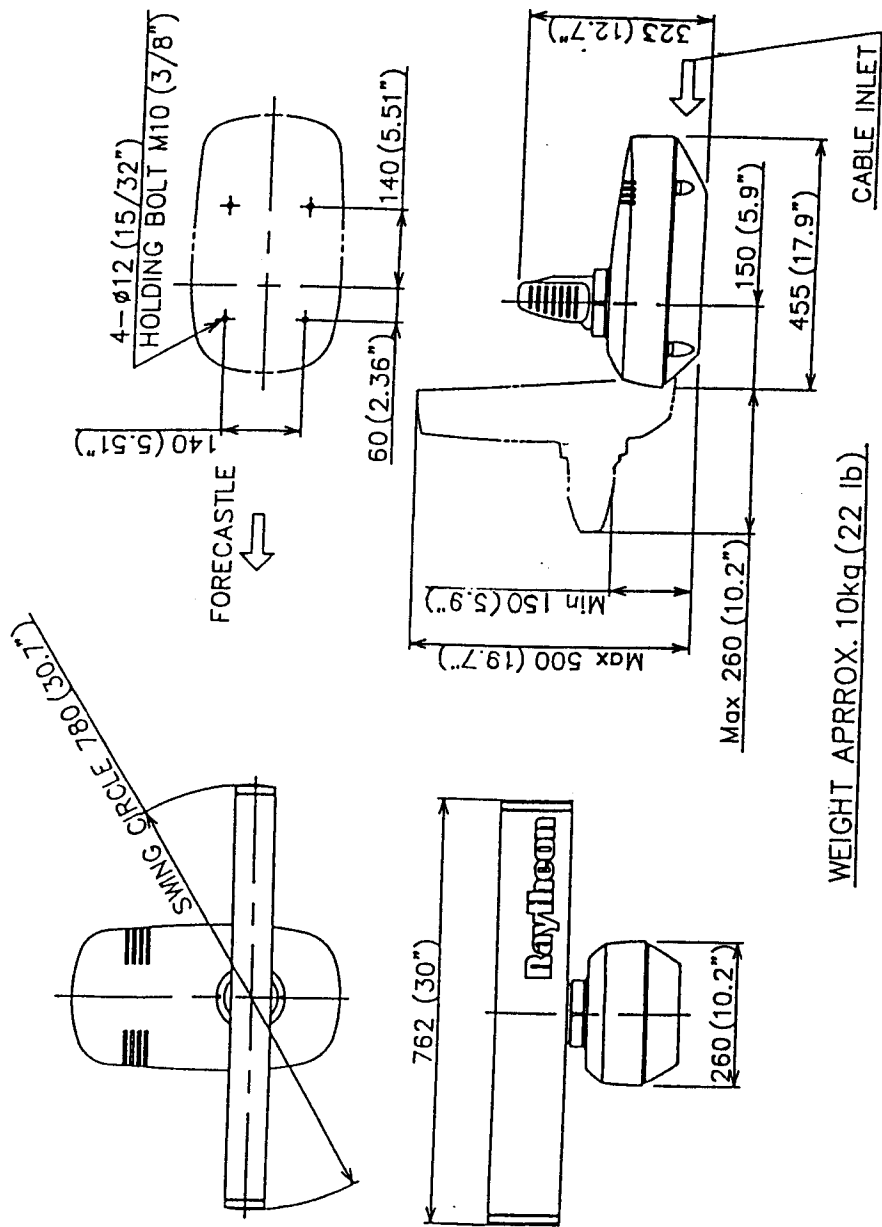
OUTLINE DRAWING OF R10X SCANNER UNIT
